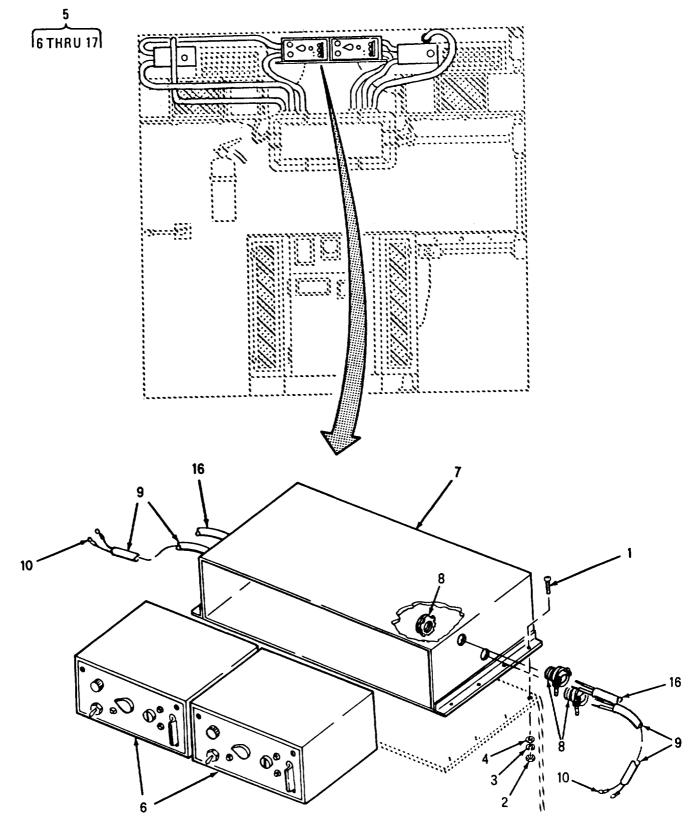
Environmental Control - Air Conditioner Control Assembly (Sheet 1 of 2)
